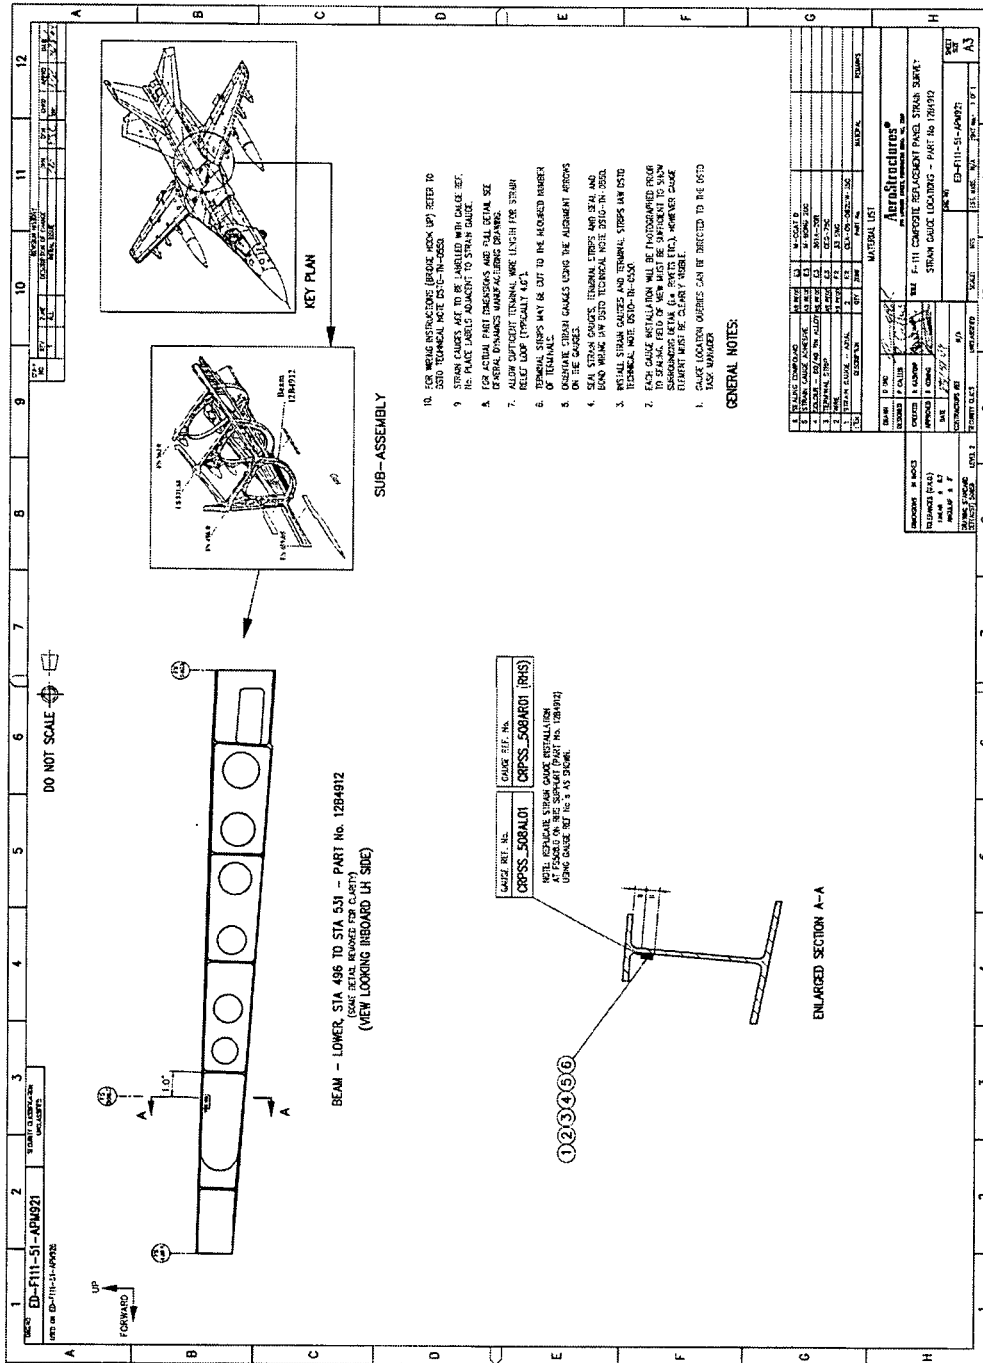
AeroStructures Drawing ED-F111-51-APM921 showing the general position of strain gauges on the Lower Beam (Part Number 12B-4912)
